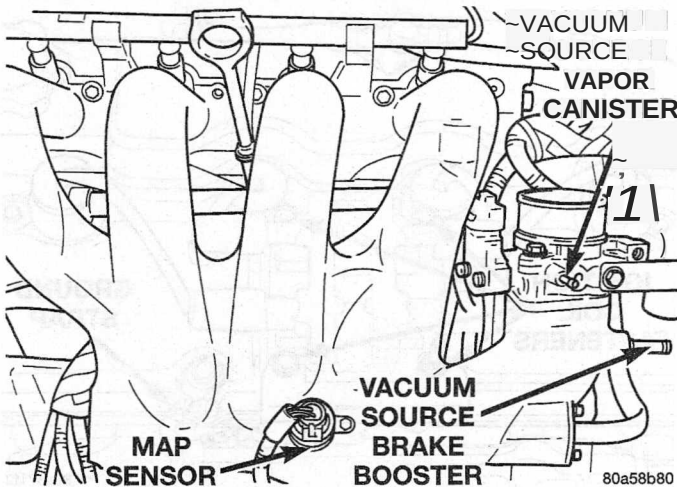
Manifold Absolute Pressure (MAP), Vapor Canister Hose, and Brake Booster Hose
